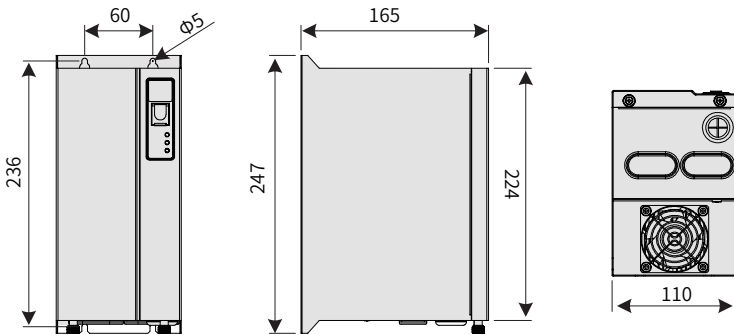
Overall dimensions of the MDBUN series braking unit (unit: mm)
